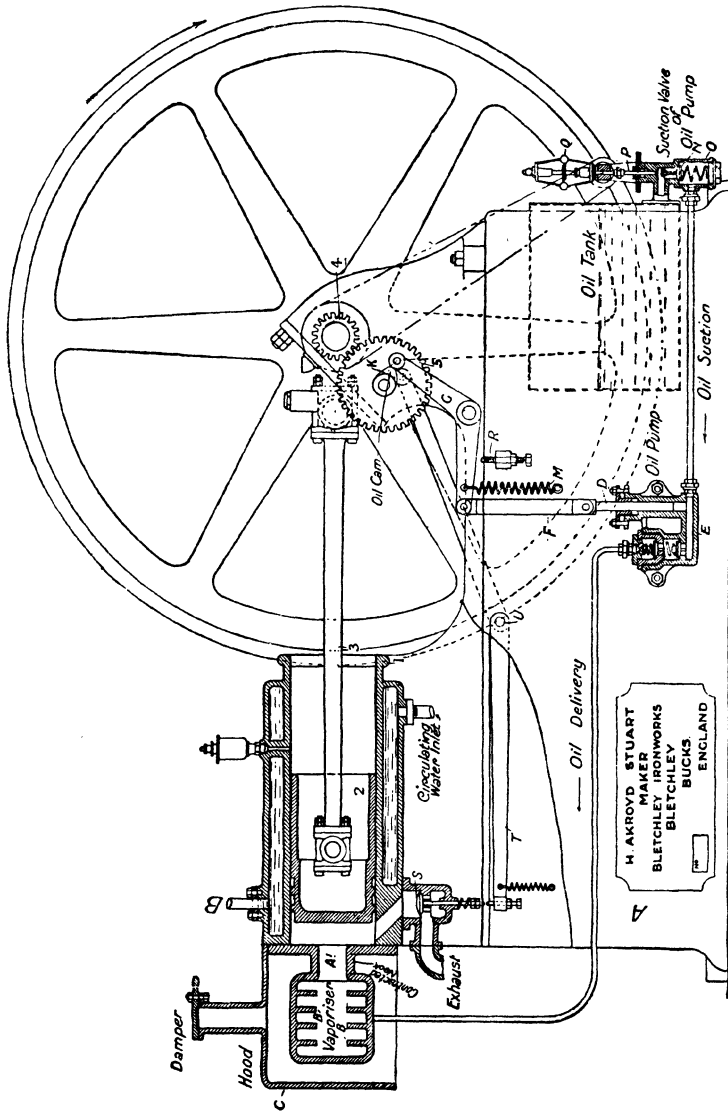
Akroyd Heavy-oil Engine (Contracted Neck Type, October, 1890)
